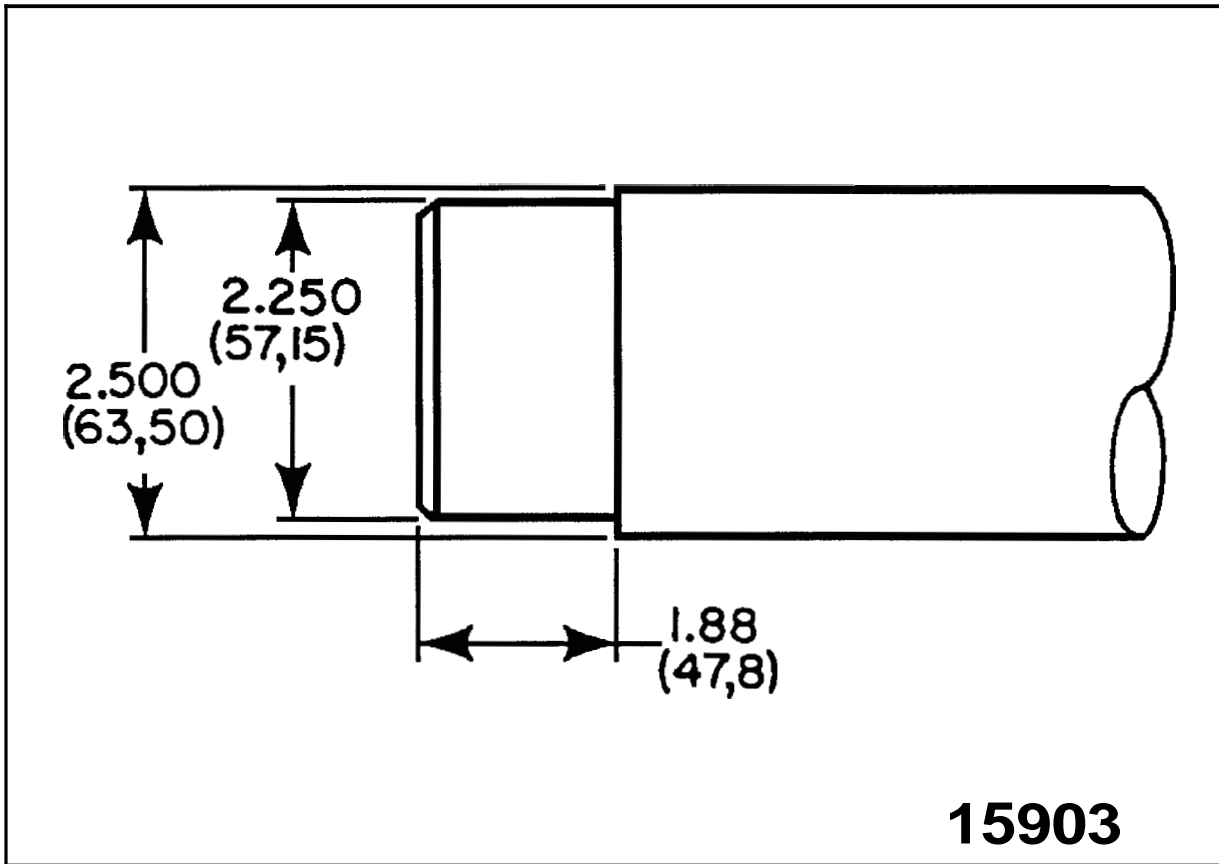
MANUFACTURING DETAILS FOR AXLE TRUNNION BUSHING DRIVER
